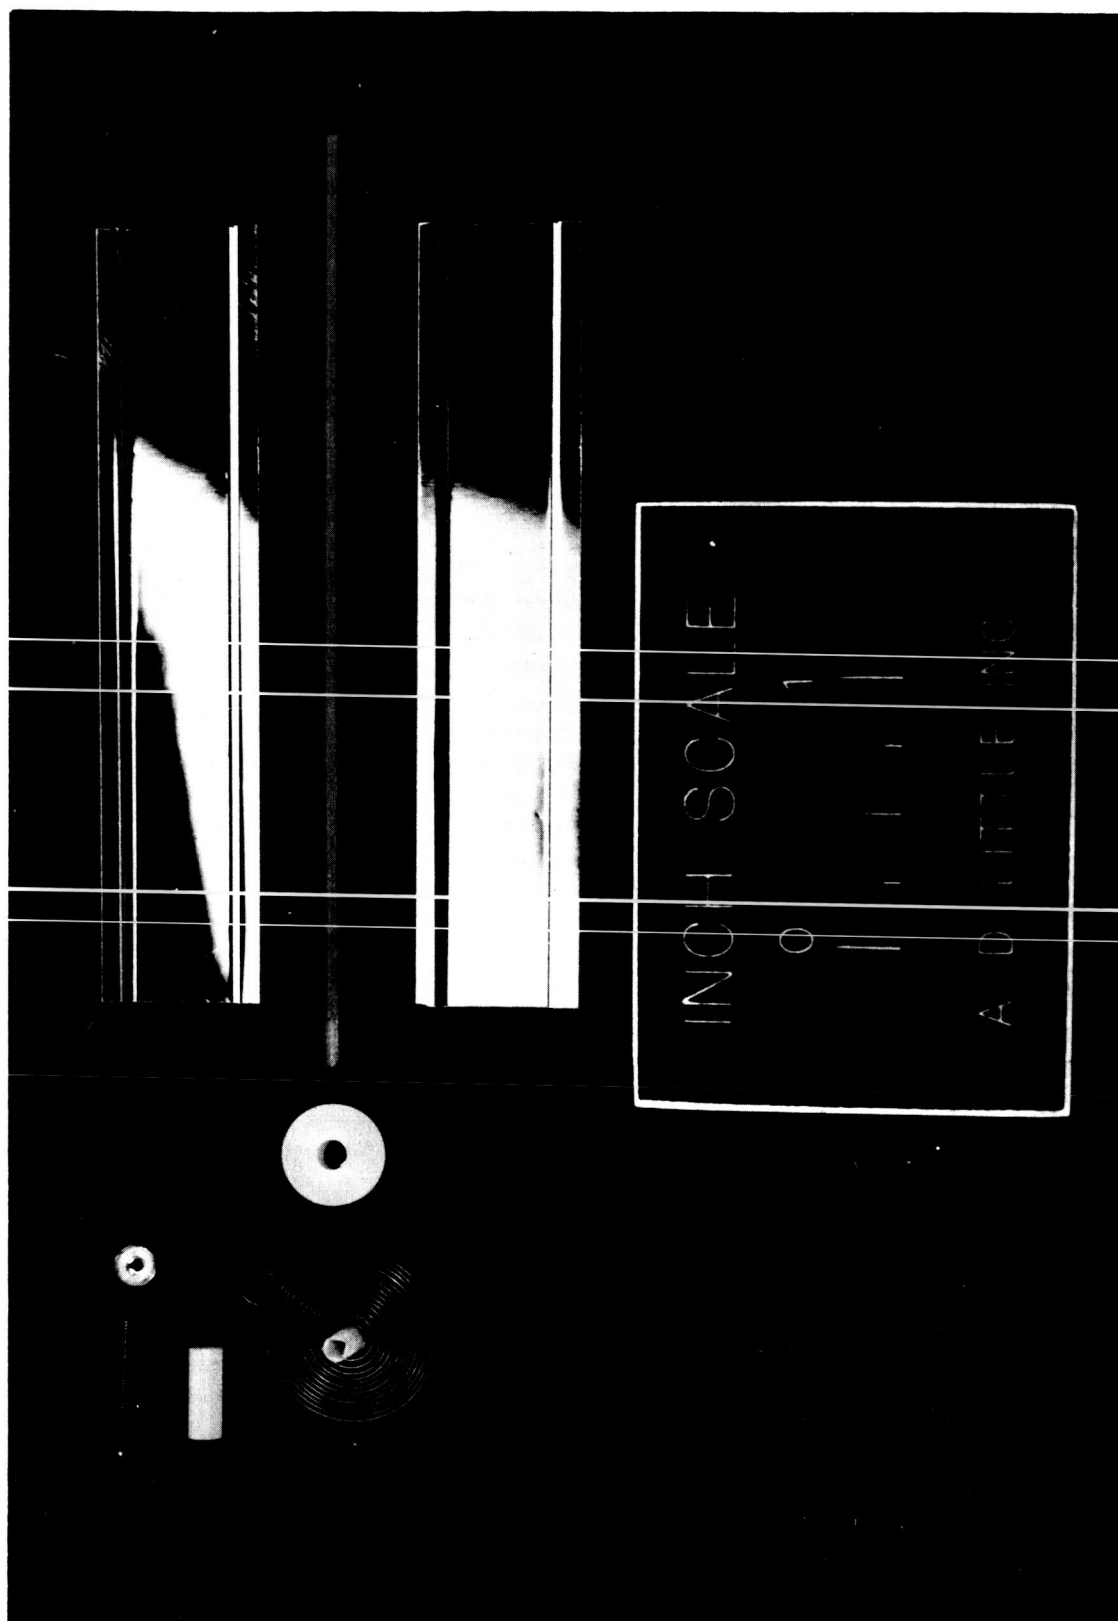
THERMAL CONTROL LOUVER BLADE ASSEMBLY
